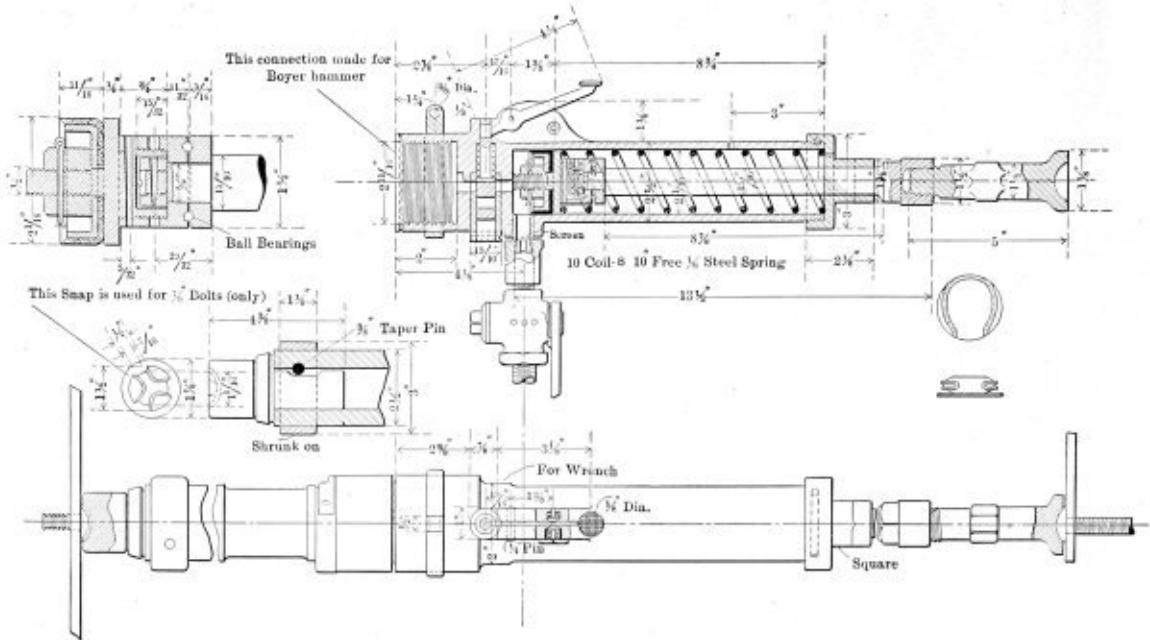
DETAILS OF SELF-SUPPORTING PNEUMATIC STAY-BOLT DRIVER.
